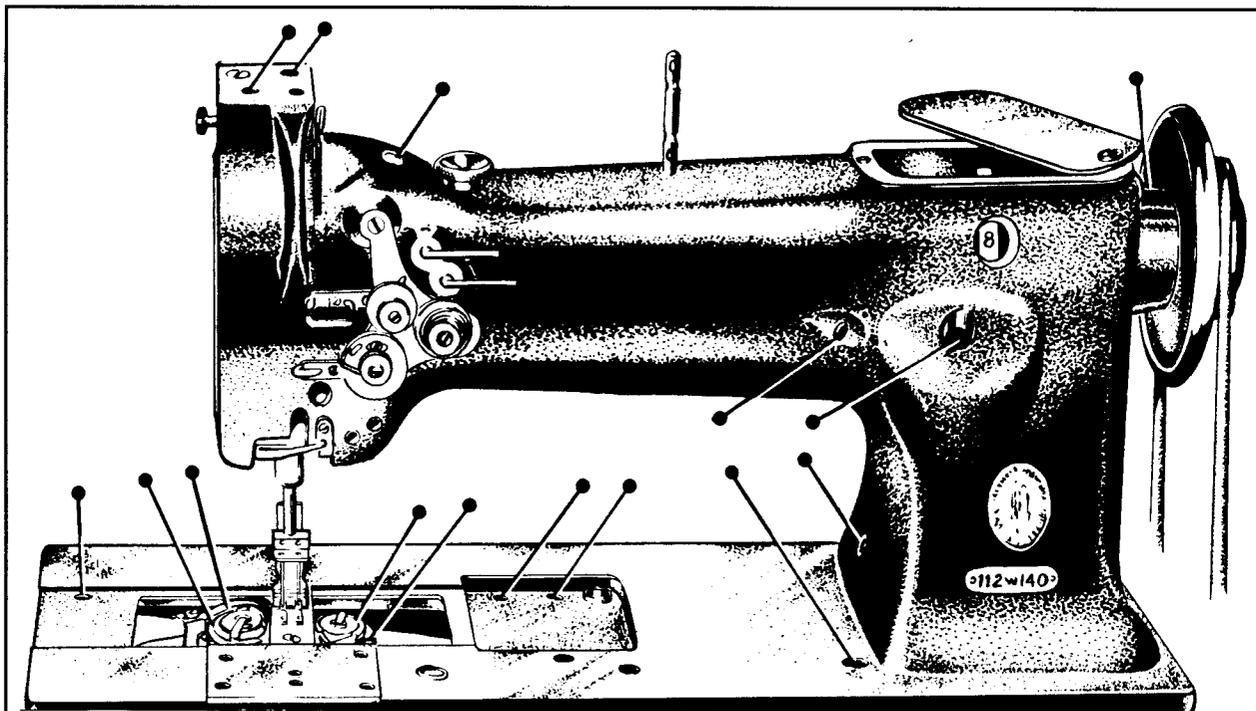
The number of oiling points on the Singer model 112 can seem overwhelming. This drawing shows the oil points on the front of the machine. Not shown is an oil point under the accessory plate in front of the needles. These points should be oiled about once every 8 hours of operation. Keep oil standing in the little cutout up above the tension assembly.
